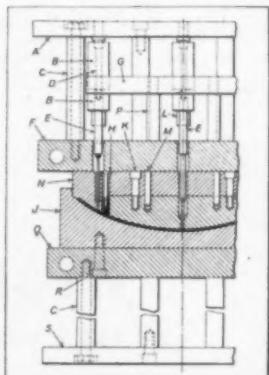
Section of compression type, landed plunger mould for plastic handles. The parts of this mould are as follows: (A) Top mounting plate; (B) Stripper plate; (C) Parallel; (D) Cap-screw; (E) Stripper pin holder; (F) Top steam plate; (G) Safety strap; (H) Mould insert; (I) Cap-screws; (L) Bumper pin; (M) Dowel-pin; (N) Top die; (P) Safety pin; (Q) Bottom steam plate; (R) Dowel-pin; (S) Bottom mounting plate; and (J) Bottom die.
